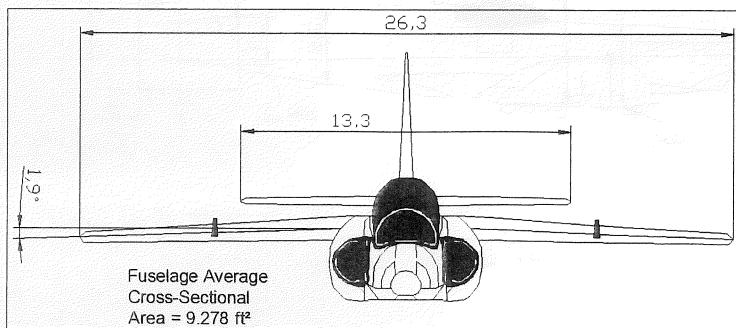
Front CAD View of the SIAI S-211 Aircraft
